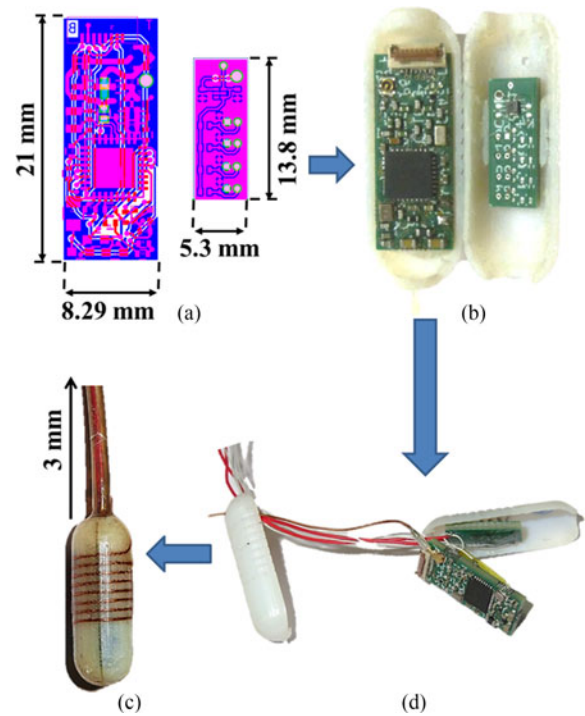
Design and manufacturing process of the full transceiver system. (a) Designed PCB of RF and thermistor board. (b) Position of the boards inside the capsule. (c) Tether connection. (d) Fully packaged capsule with antenna.
